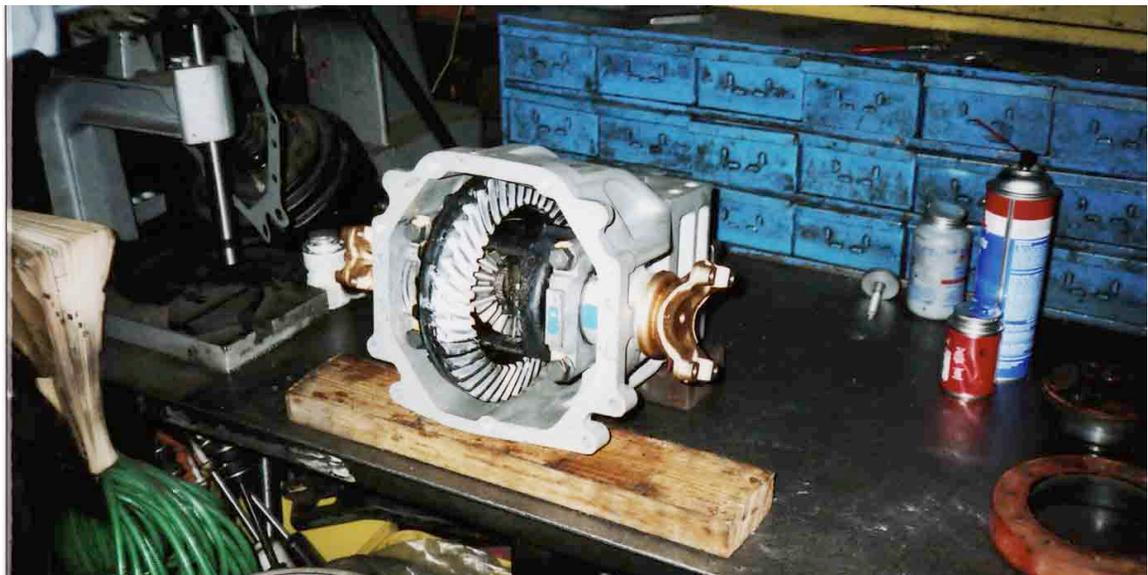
Photo shows Dana 44 differential with batwing removed and 4.88 racing gears in place.
